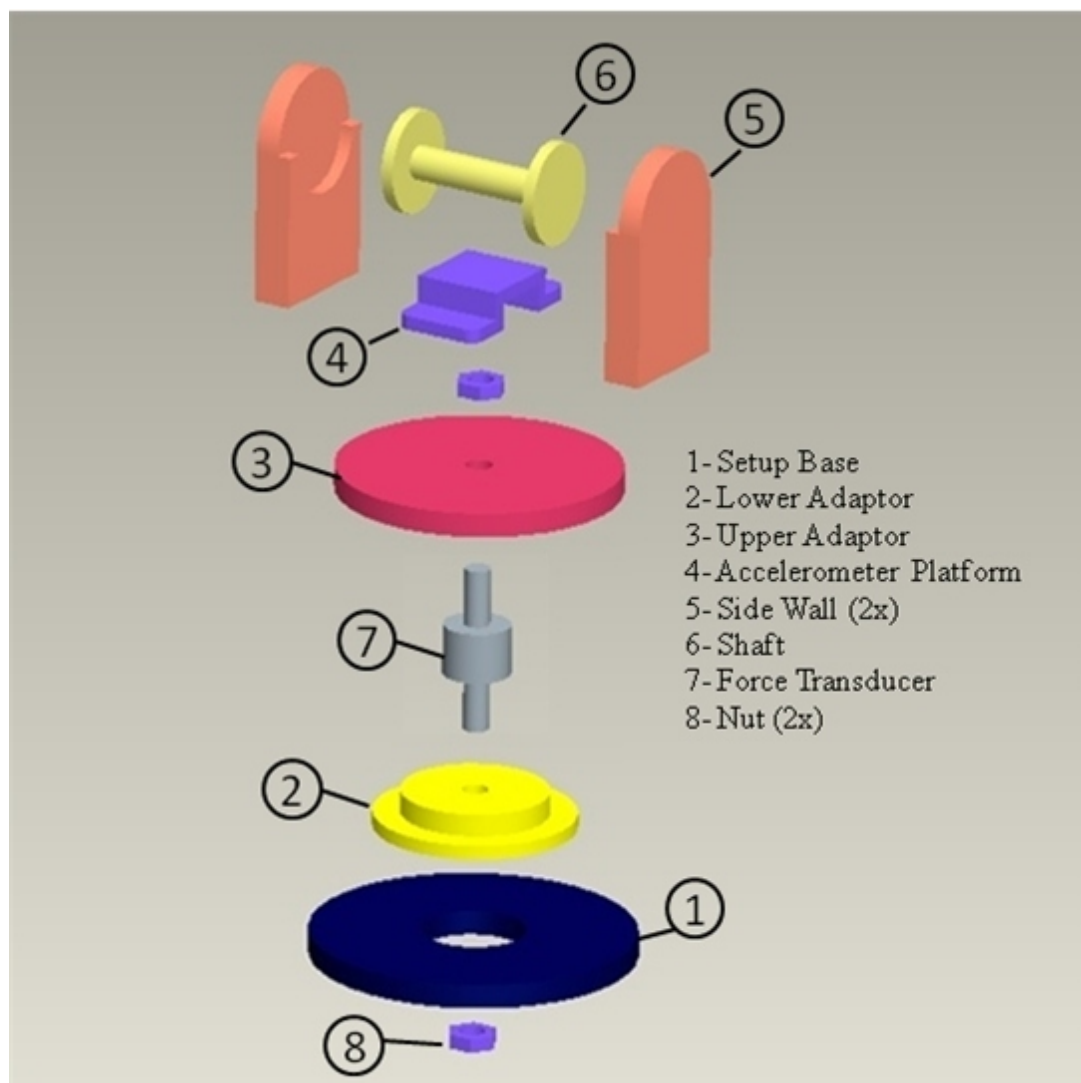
Exploded view for the simplified CAD model of the conceptual test setup
